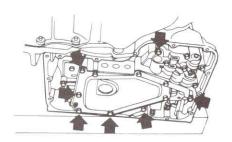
Control valve assembly bolt locations (Sec 8)
